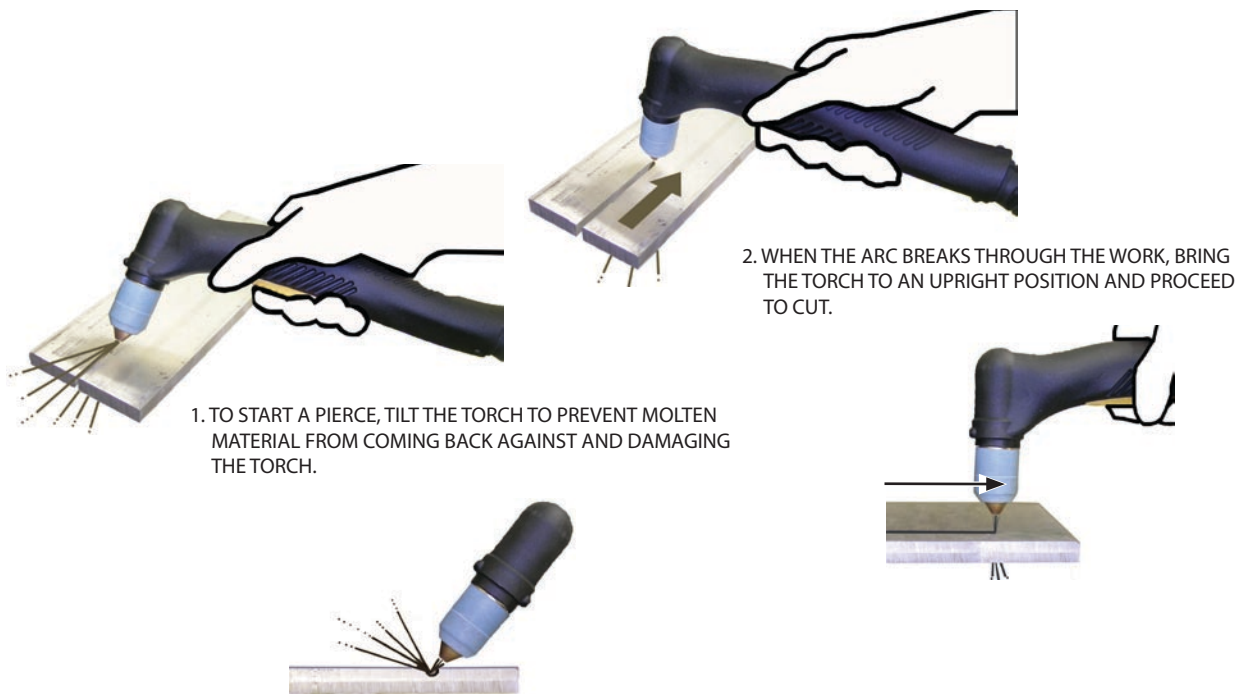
Piercing & Cutting Techniques using the PT-38
